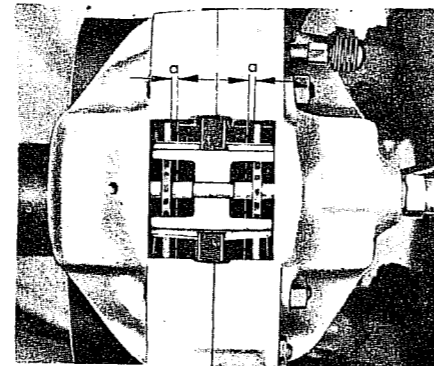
Thickness of the brake pads "a" must not be less than 2.0mm. (0.08 in.)
